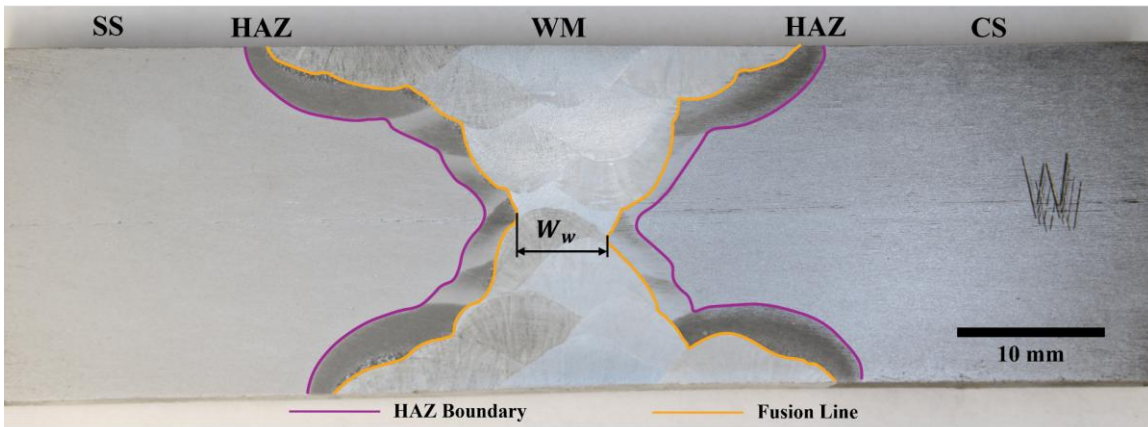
Representative macroetch cross-section of a dissimilar weld, showing the identification of stainless steel (SS), weld metal (WM), and carbon steel (CS), and weld neck width (W_w) measurement. The heat-affected zone (HAZ) boundary and fusion line are indicated.
